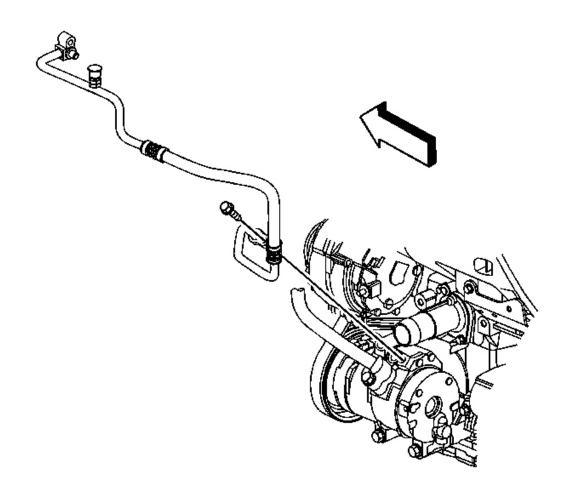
View Of A/C Condenser Line Bolt & A/C Compressor Courtesy of GENERAL MOTORS CORP.
